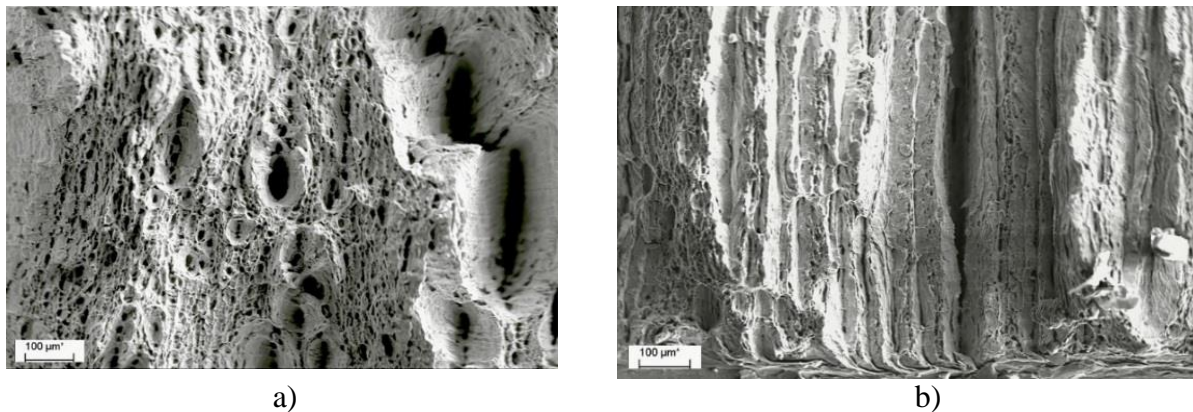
Fracture surfaces of Charpy specimens after impact testing cut out from the element of the operated reloader, and oriented longitudinally (a) and transversally (b) to the rolling direction of the steel sheet.
